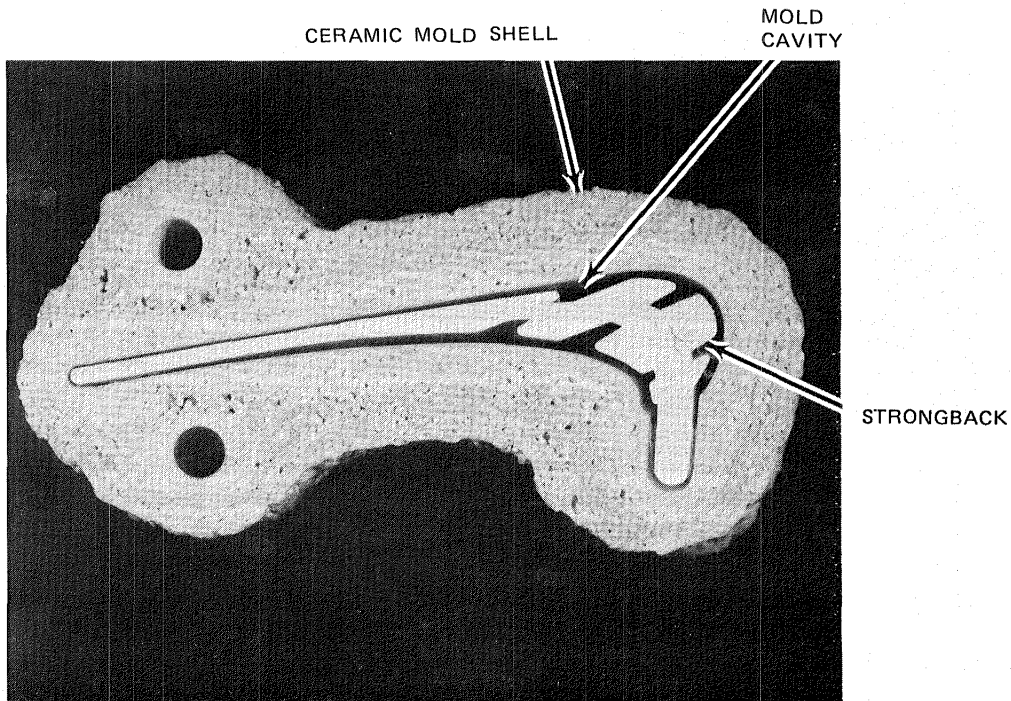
Transverse Section through Blade Mold Assembly Showing Desired Mold Cavity
